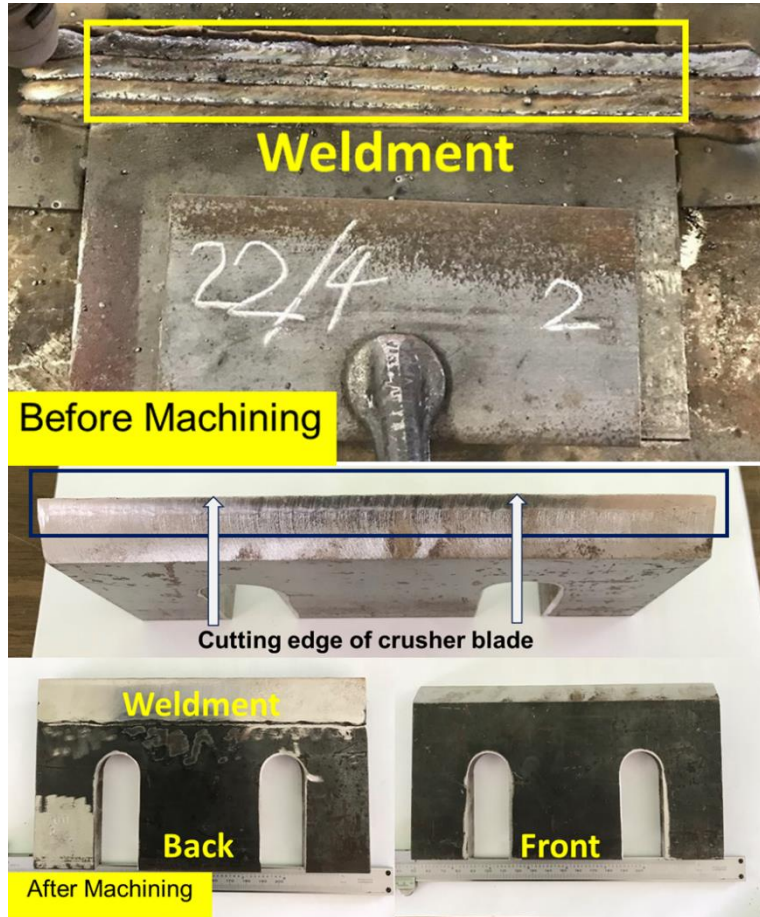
Visual testing of the welded specimen before and after machining of the excess weld.
